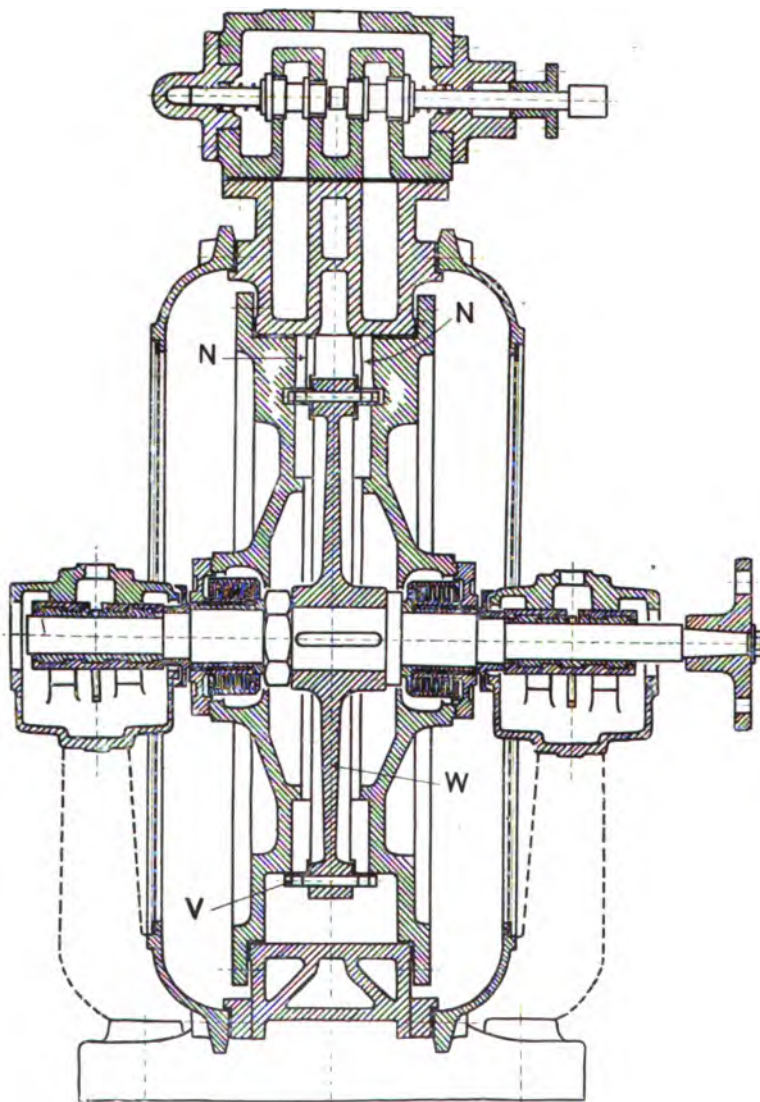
Elektra Single-stage Reversing Steam Turbine.
